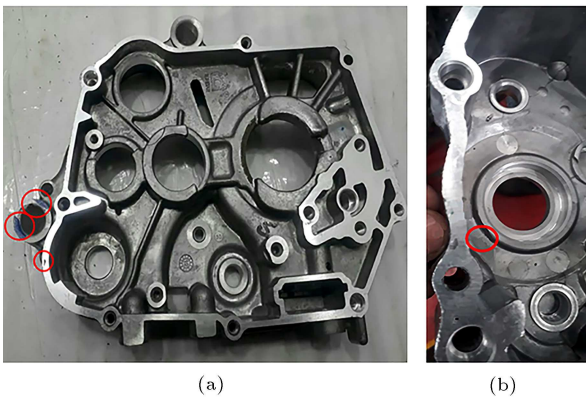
Crankcase specimen produced with the High-Pressure Die Casting (HPDC) process.
